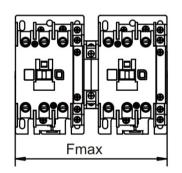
TGC1s-09N~38N outline and installation dimensions drawings
